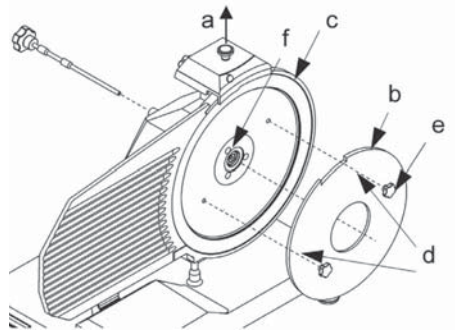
Assembling the Plexiglas blade removal tool (b)
